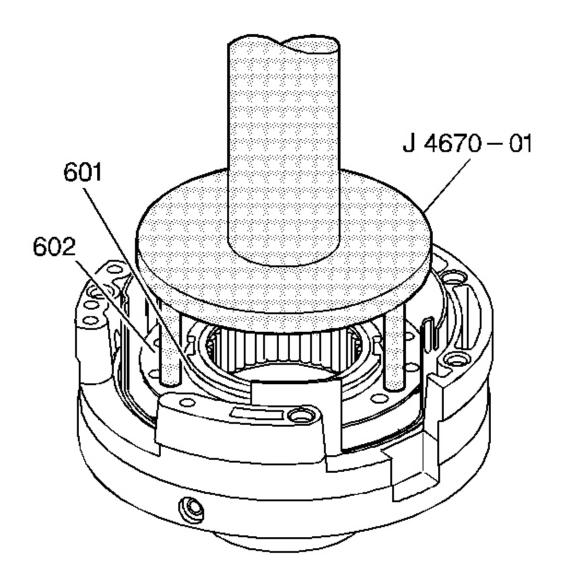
Using J 4670-01 To Compress The Fourth Clutch Spring Assembly Courtesy of GENERAL MOTORS CORP.
